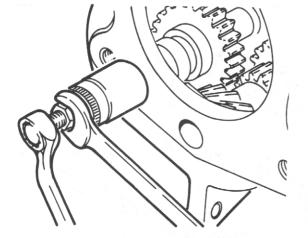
Method of removing the reverse gear idler shaft (Sec 4)
